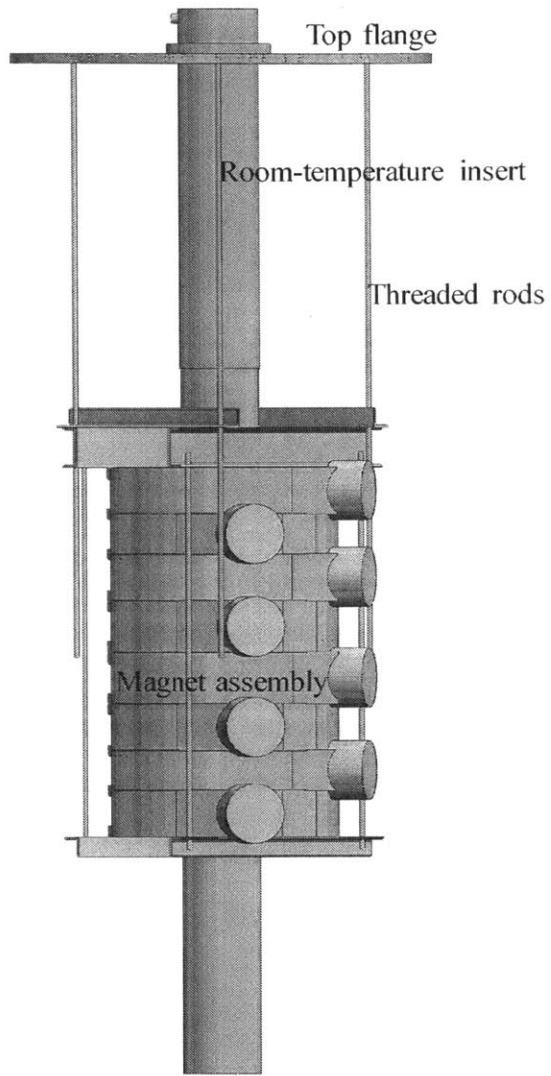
Drawing of the full test rig main structure: top flange, room-temperature insert, four stainless steel rods, and magnet assembly.
